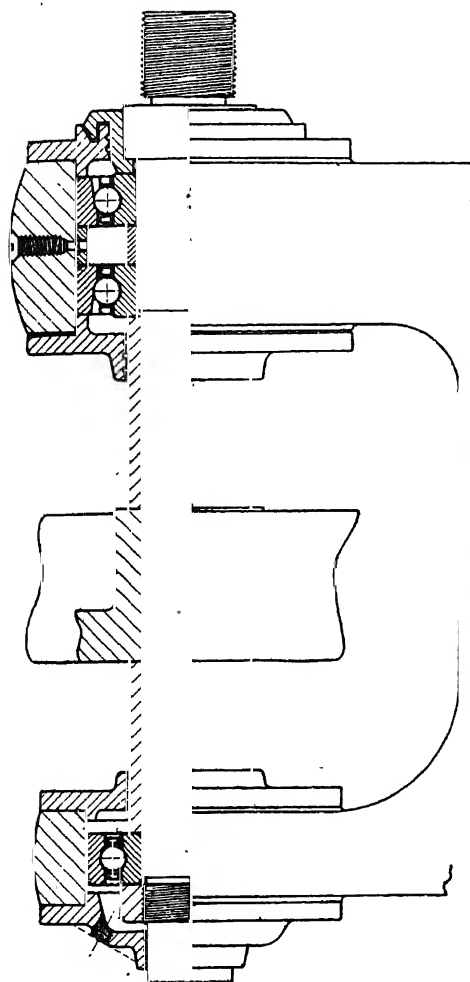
Angular-contact ball bearings paired back to back and preloaded.
